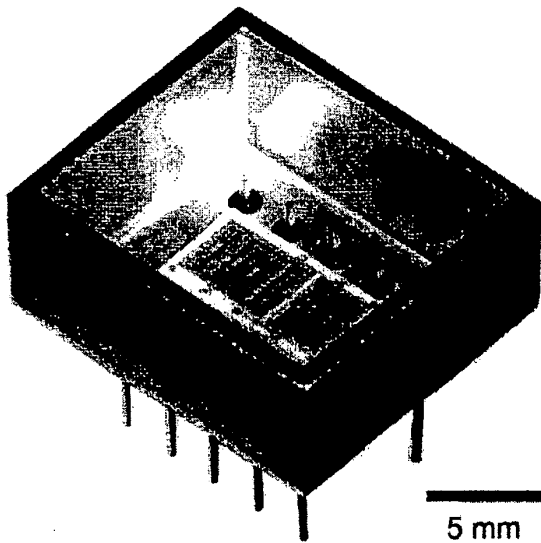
LIGA gyrometer adhesively bonded and wire bonded into a flatpack
